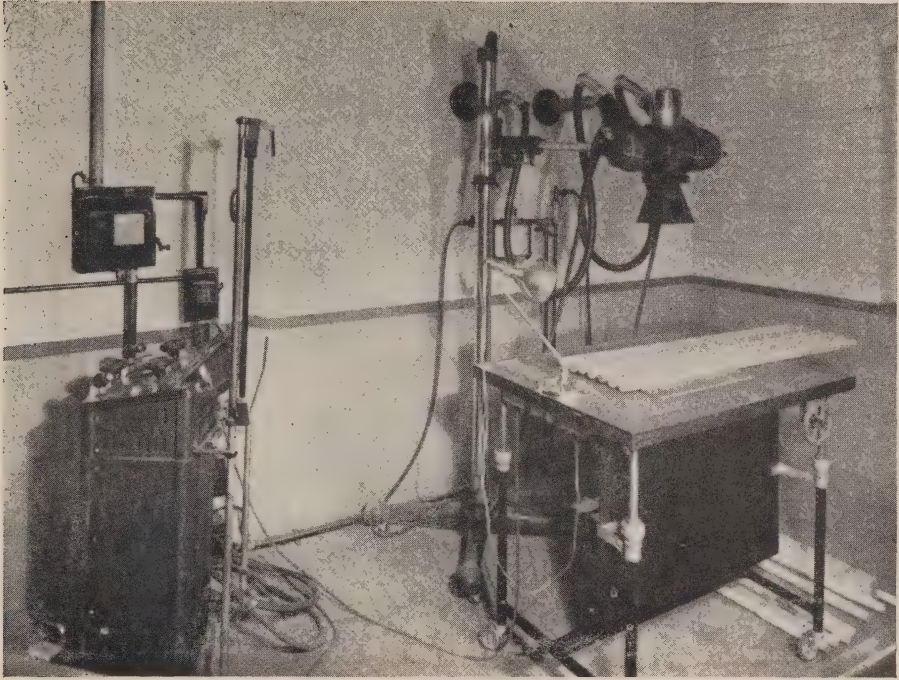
X-ray unit arranged for taking radiographs of cast aluminum conductor joints.
